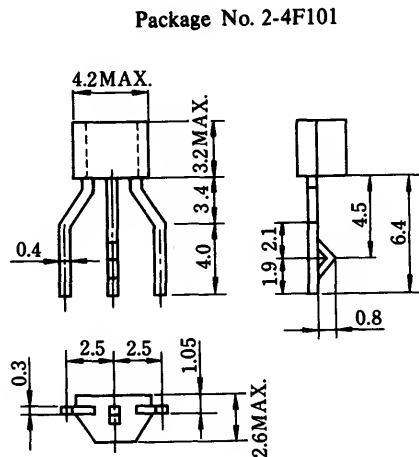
(a) Forming dimensions of TO-92 package transistor
